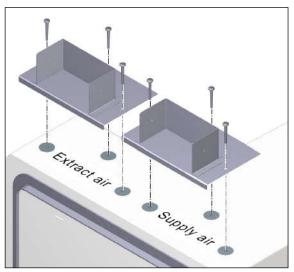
M-WRG-M/MB-FR75/2, fixing the fixing plates for extract air and supply air
